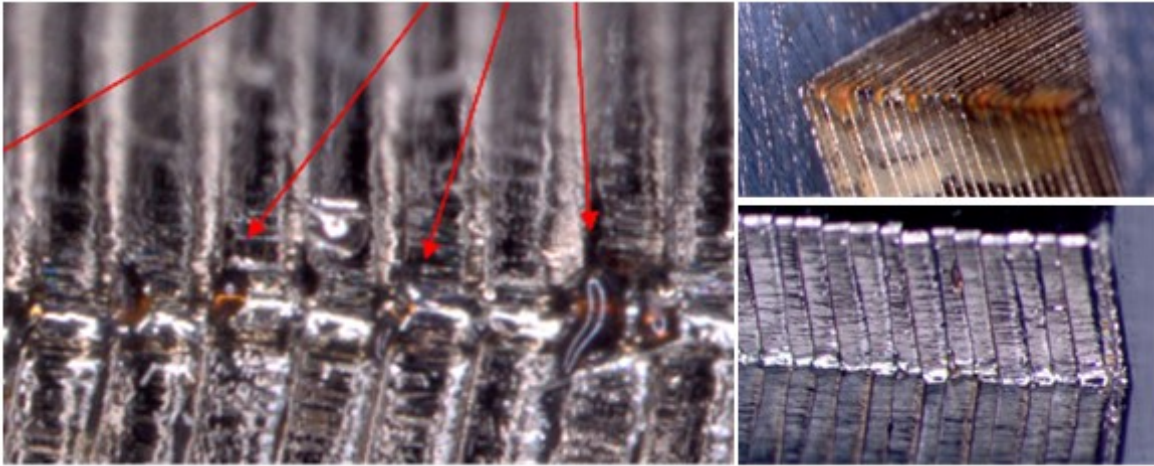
Bonding varnish protrusions visible after Nickel plating (left), corrosion on nickel-plated stator sample after humidity test (top right) and sample with Parylene layer after humidity test (bottom right)
